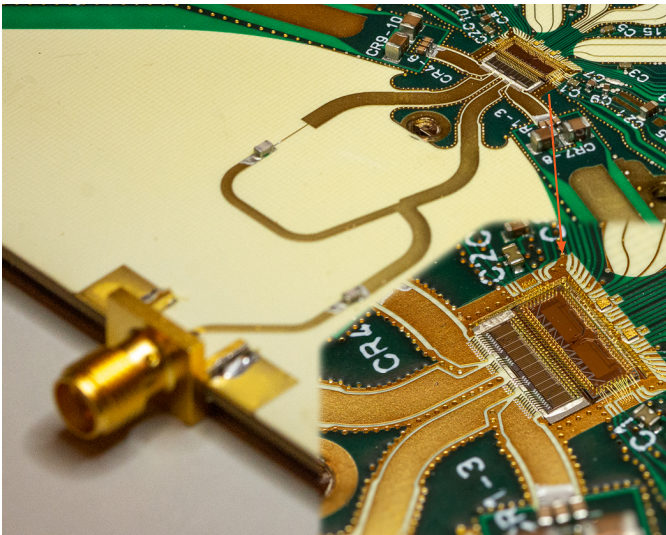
Photograph of the realized Doherty combiner on PCB.
